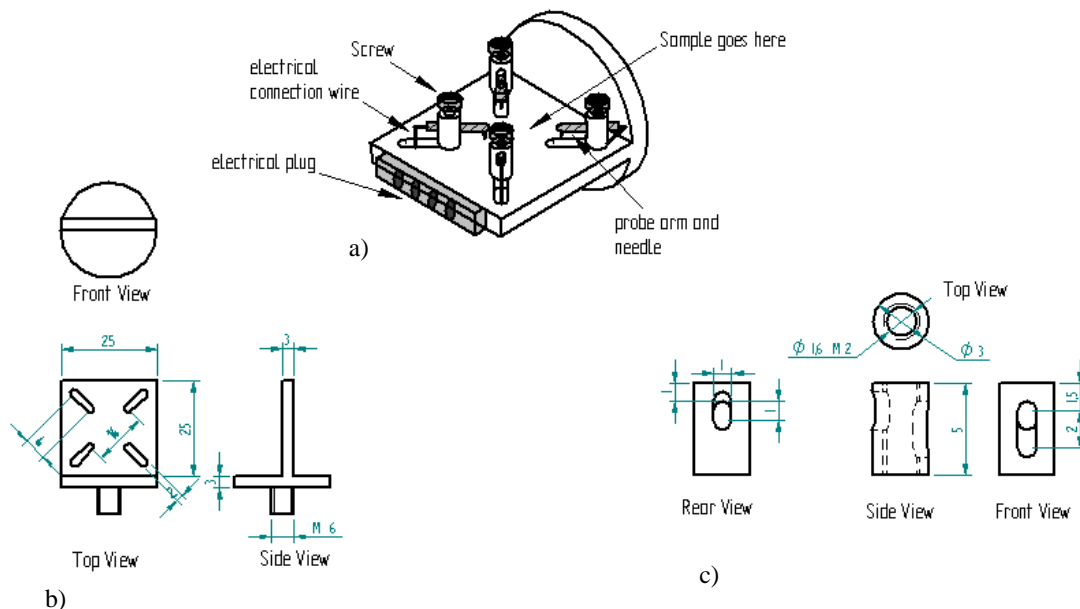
Sample holder plans and assembly; a) entire assembly, b) design of the sample table, c) pin holder design
